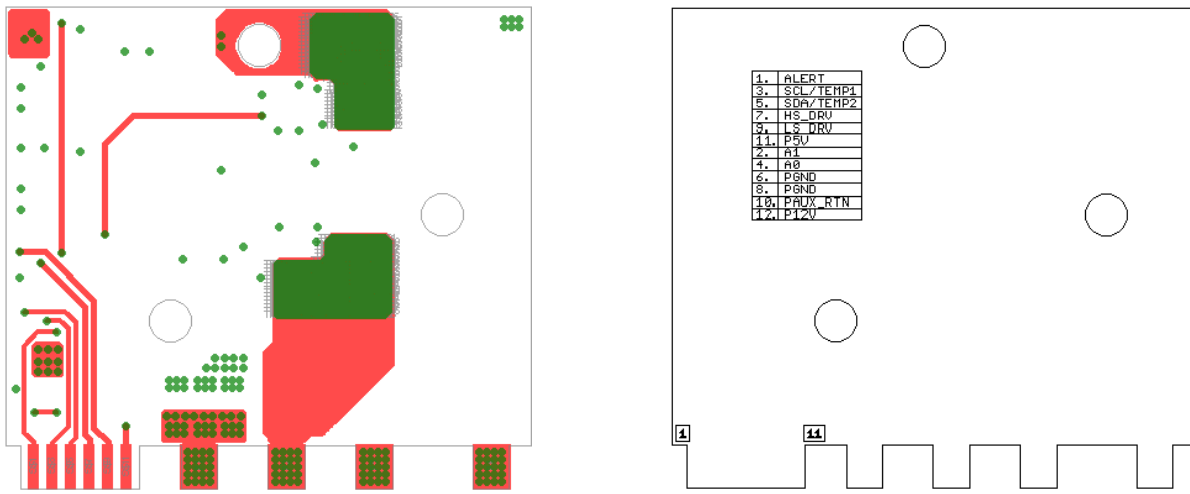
Top Layer PCB Layout and Assembly Plan of FAST LEG CARD
